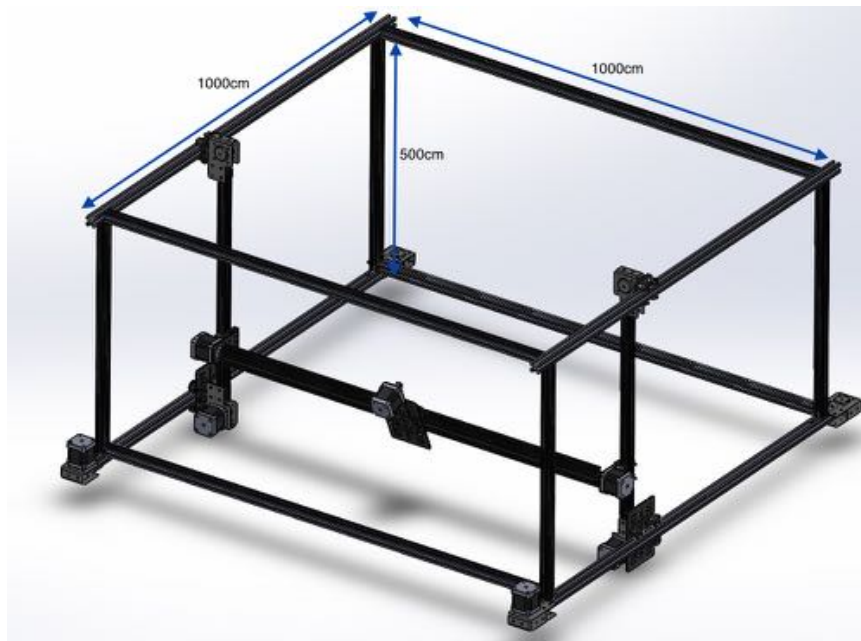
The SolidWorks CAD assembly of the Chronos testing apparatus
